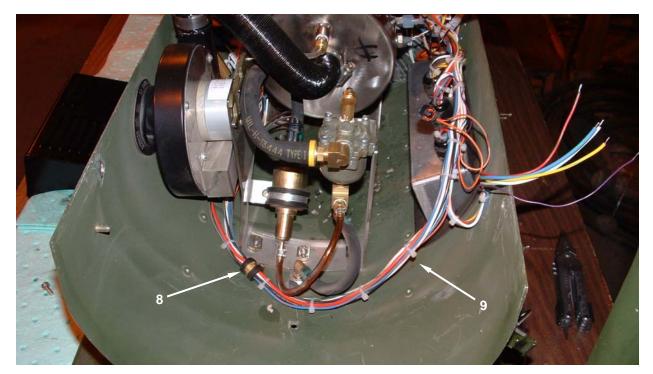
Replace the Electronic Box Assembly, Complete With Wire Harness – Disconnect Battery Connection.
